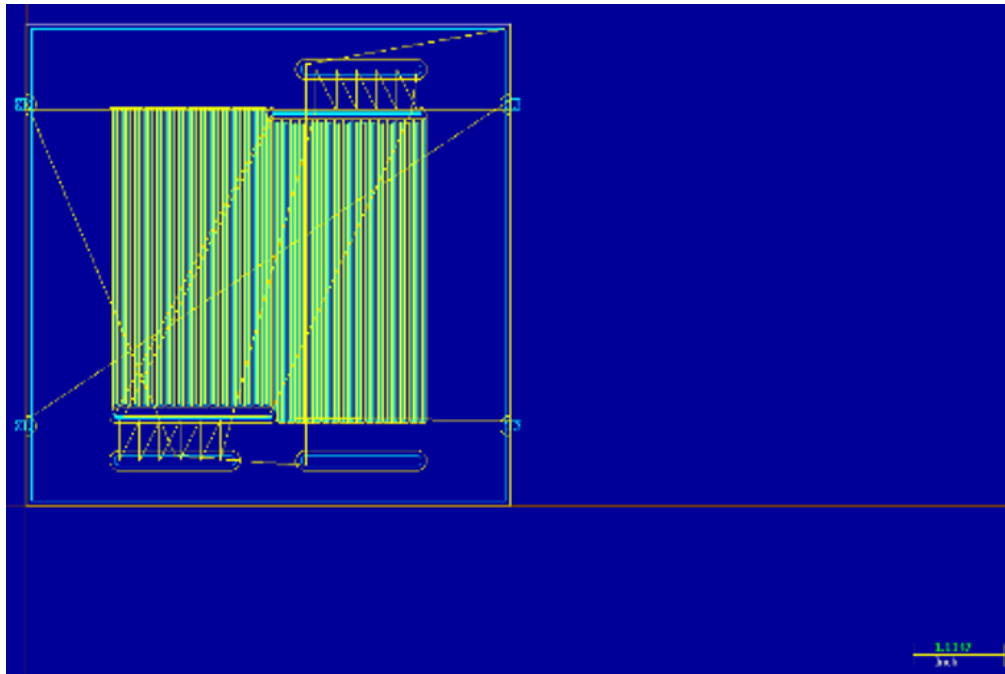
Figure E – Mastercam rendering of desired cutting path for fuel cell plate
